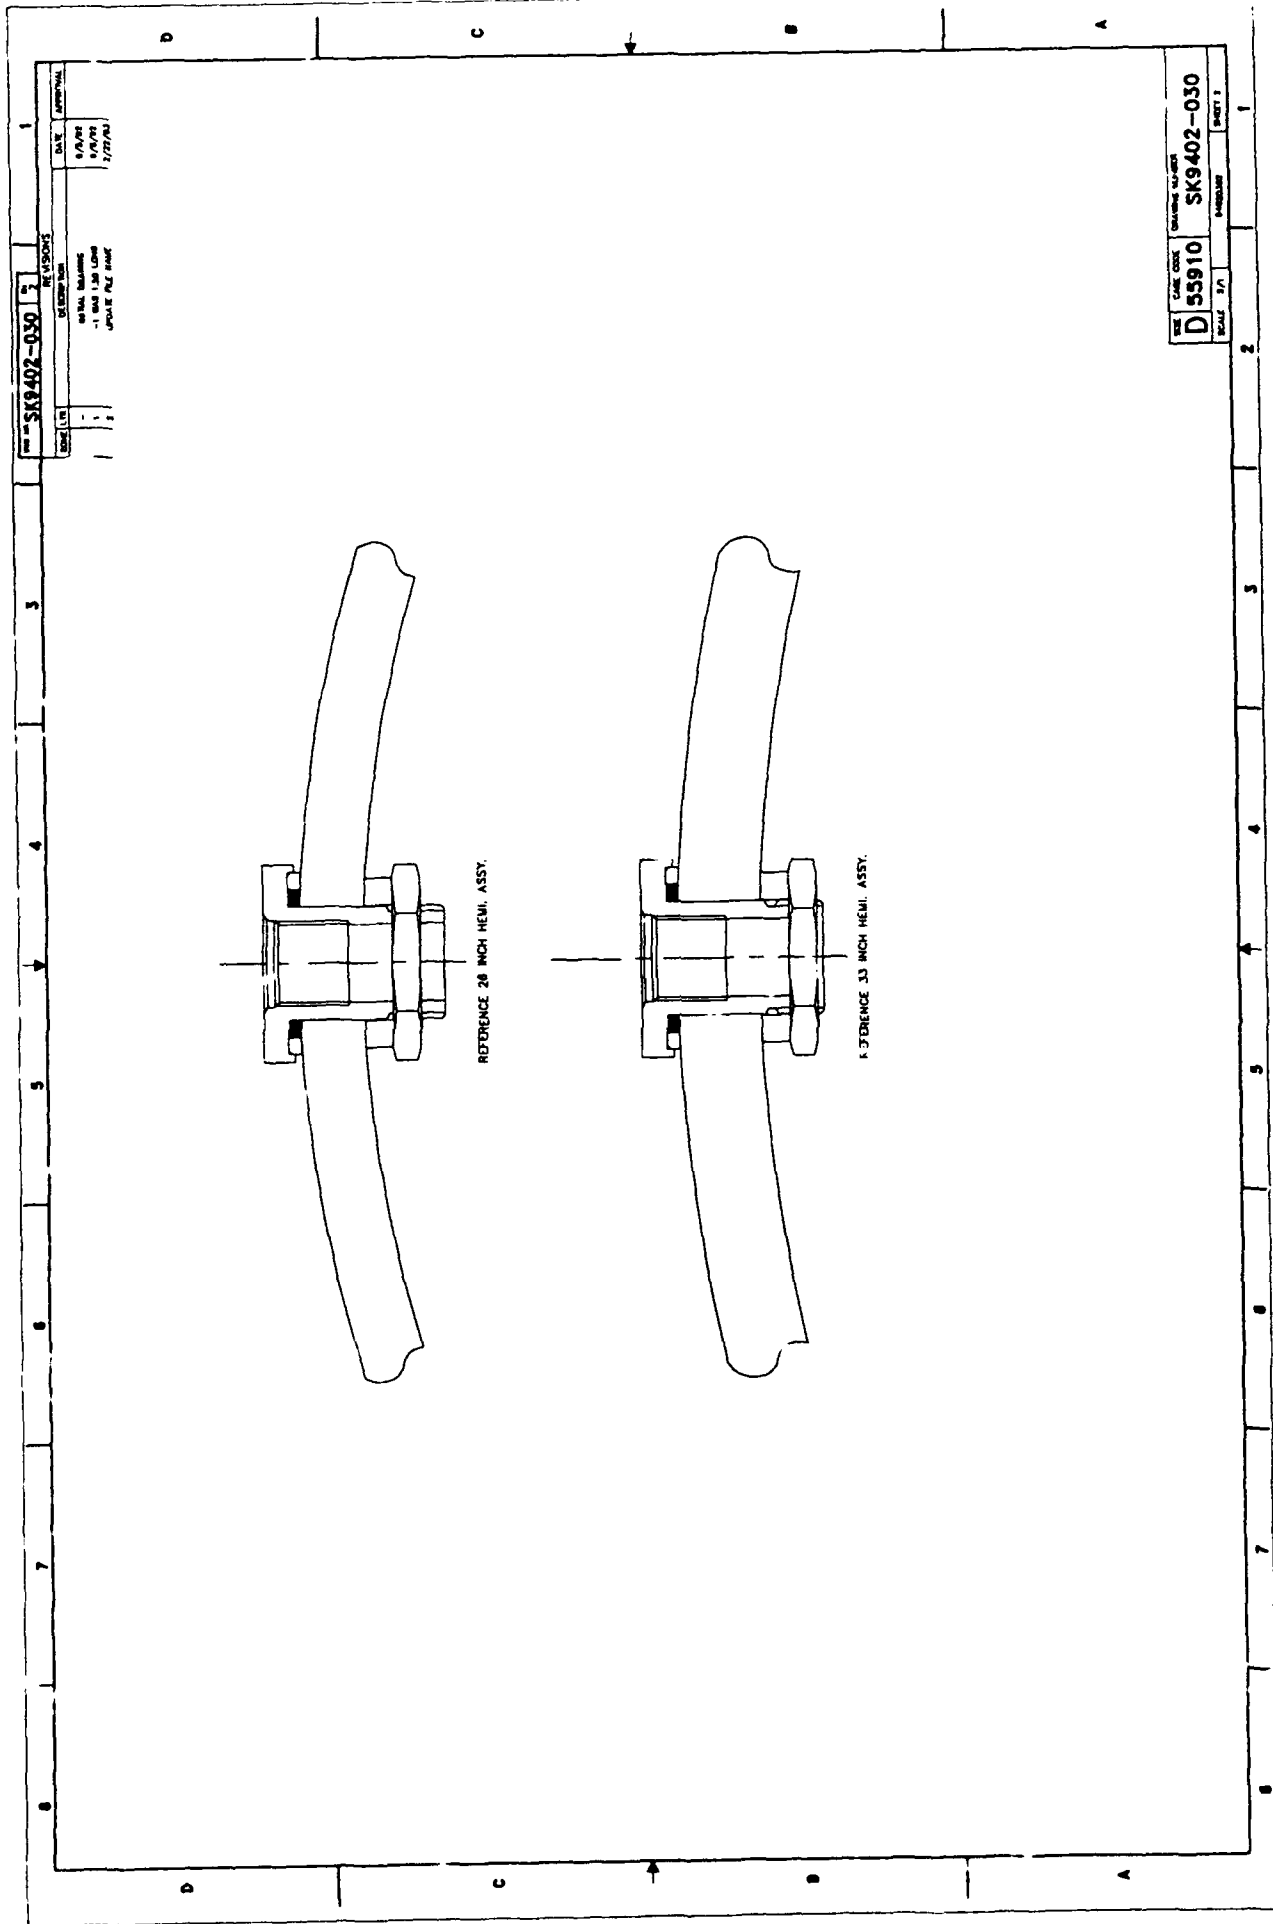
Original design of the pressure-relief insert for the forward head assembly, sheet 2.
